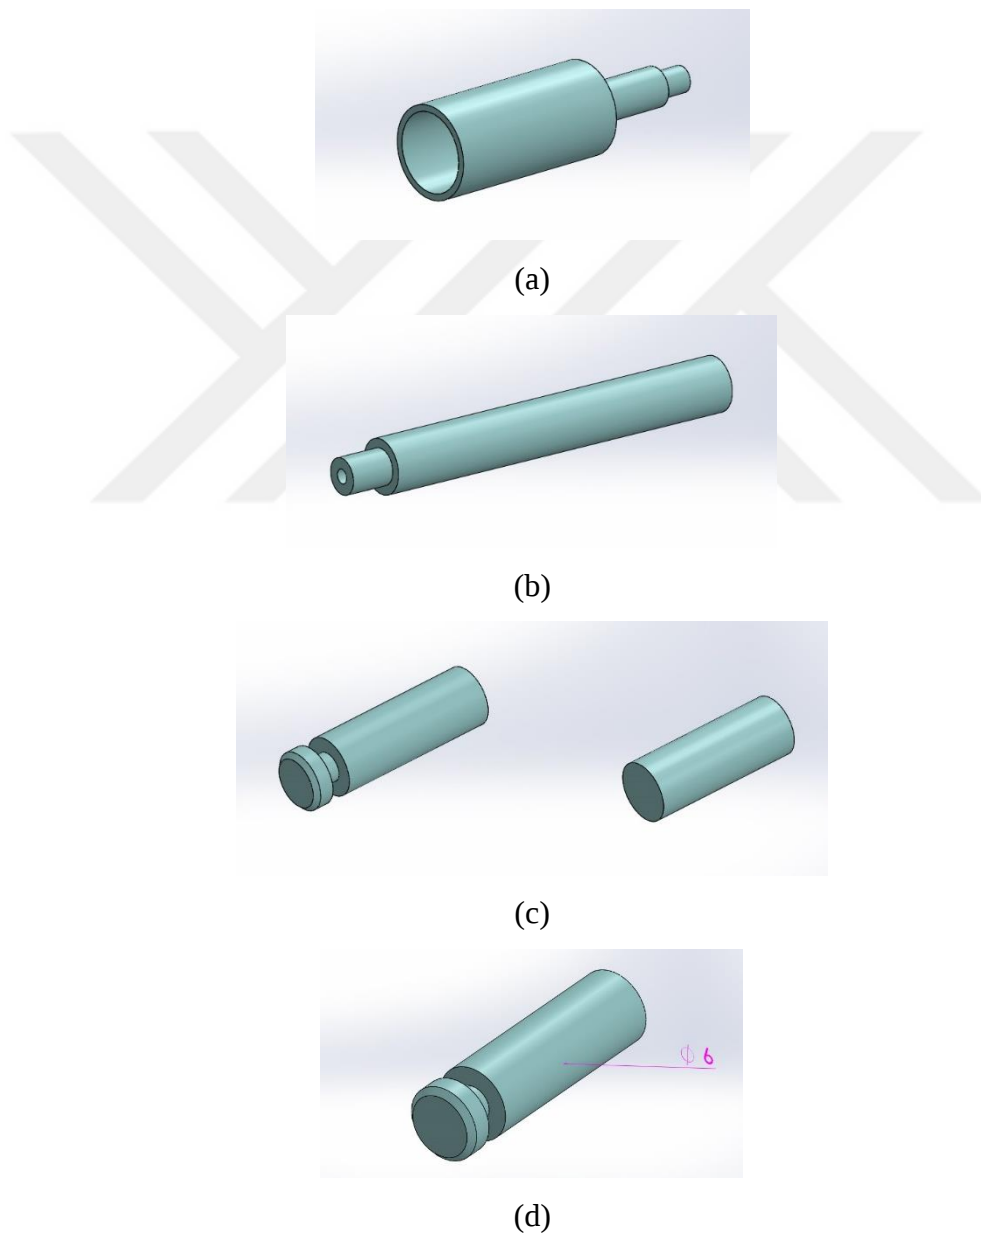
Mover parts (a) Magnet housing (b) The in-connector (c) End parts (d) Piston
